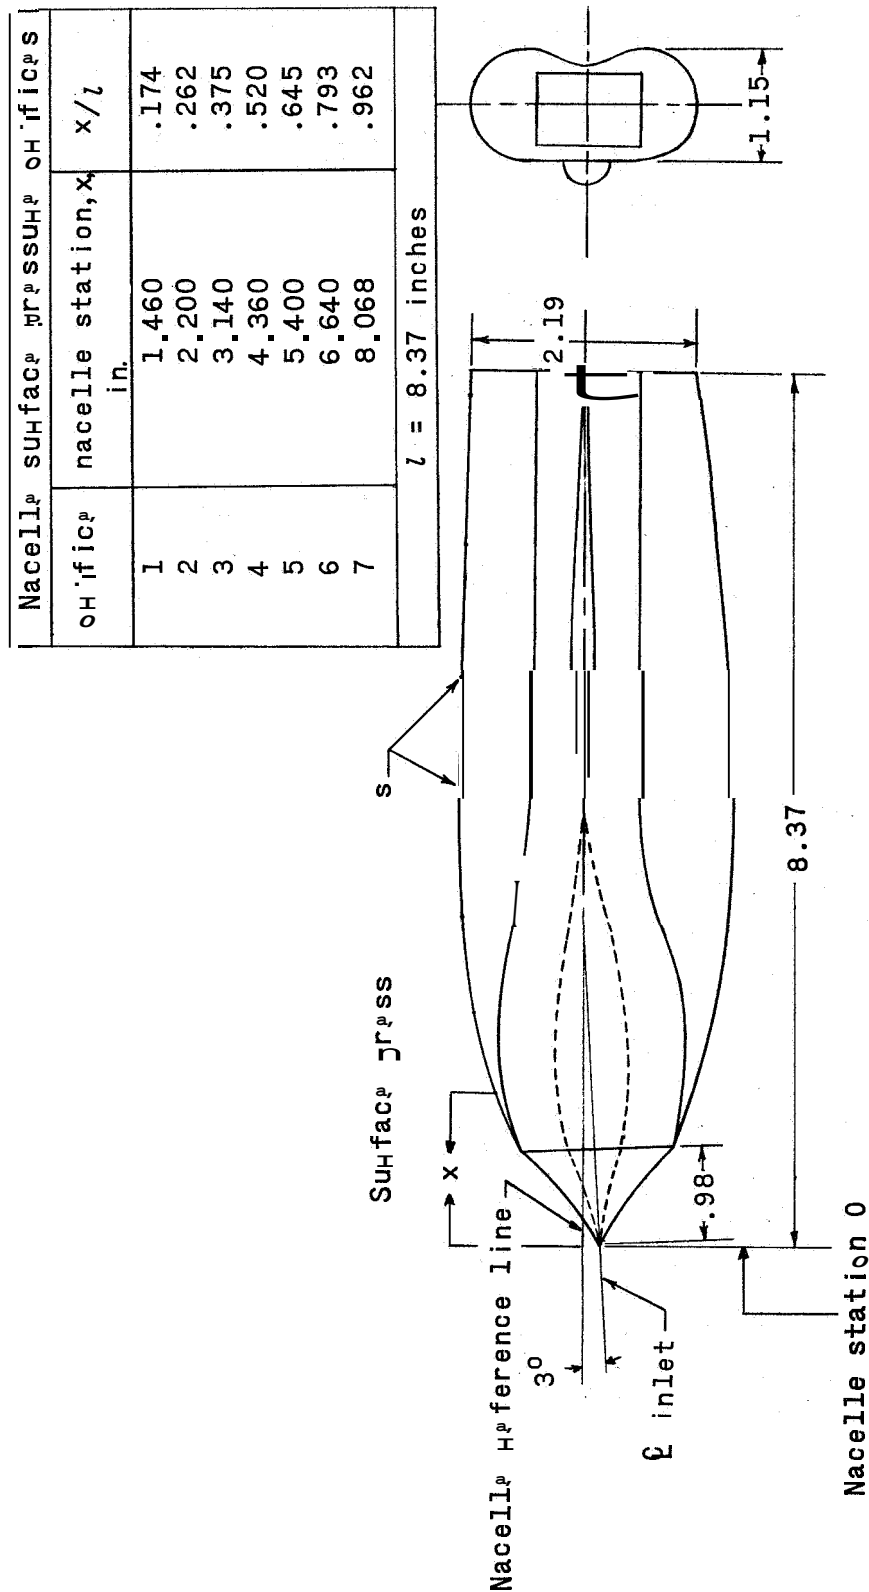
Drawing of the wing-tip nacelle. Dimensions are in inches unless otherwise noted.
